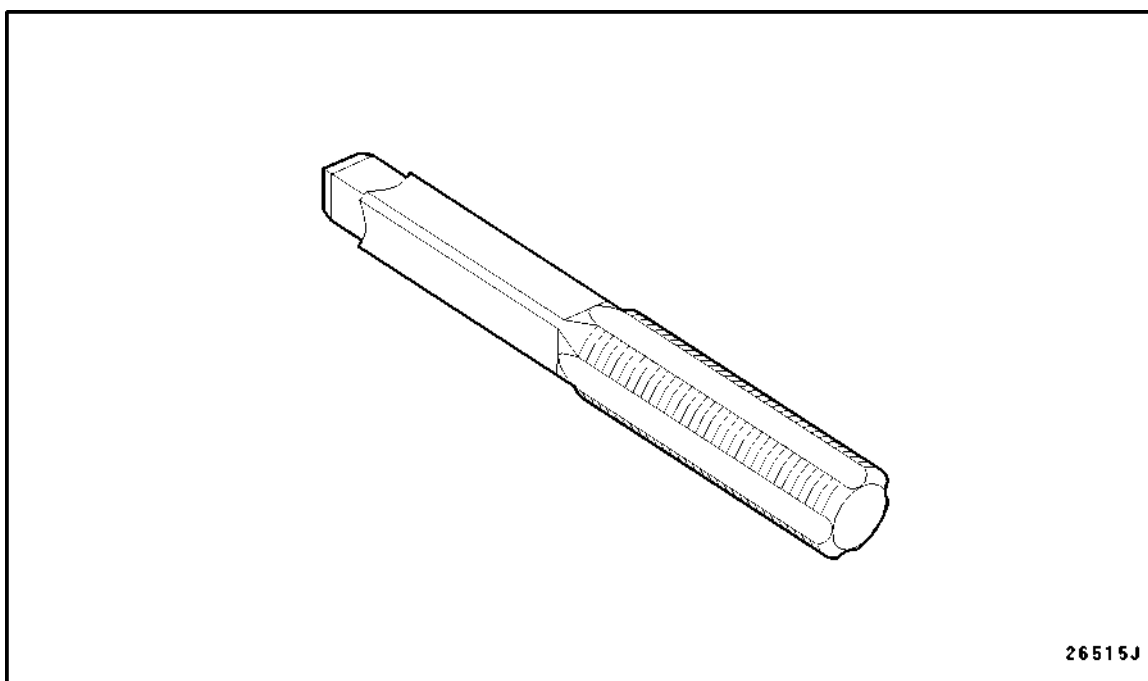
Cylinder Head Bolt Bottom Tap,J 41962
